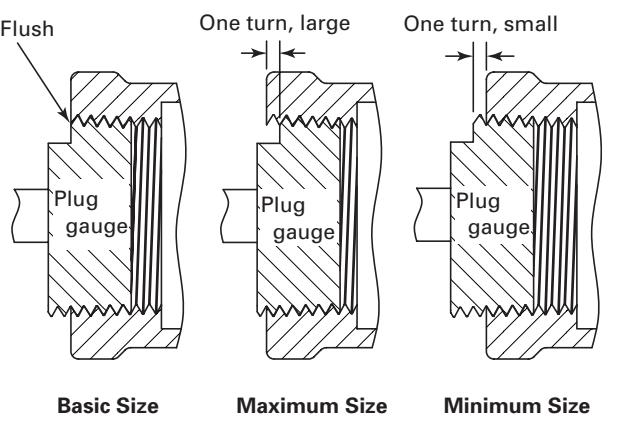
Gauging Internal Taper Threads With Plug Gauge
